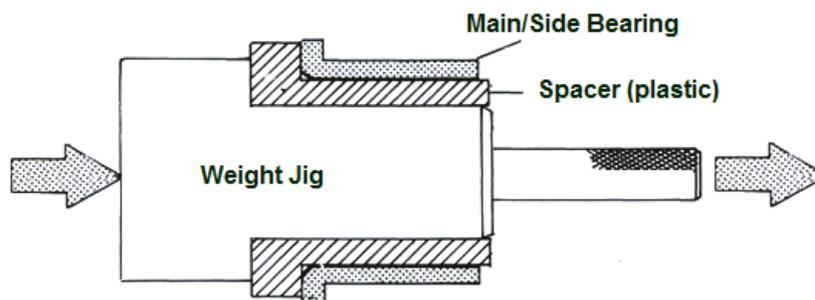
Spacer and Weight Jig for press-fitting a Bearing
